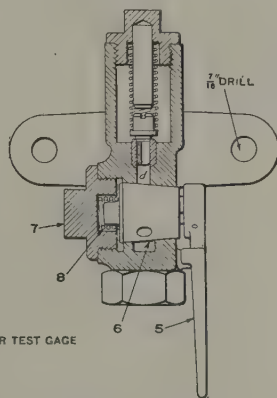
Spring Type Single Pressure Retaining Valve.
